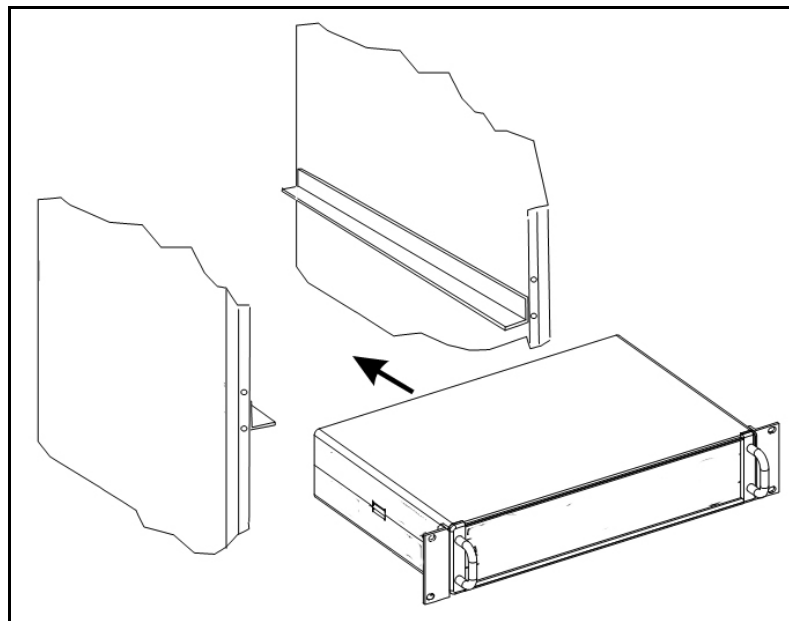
Installing the 1830 into the 19-Inch Equipment Rack
